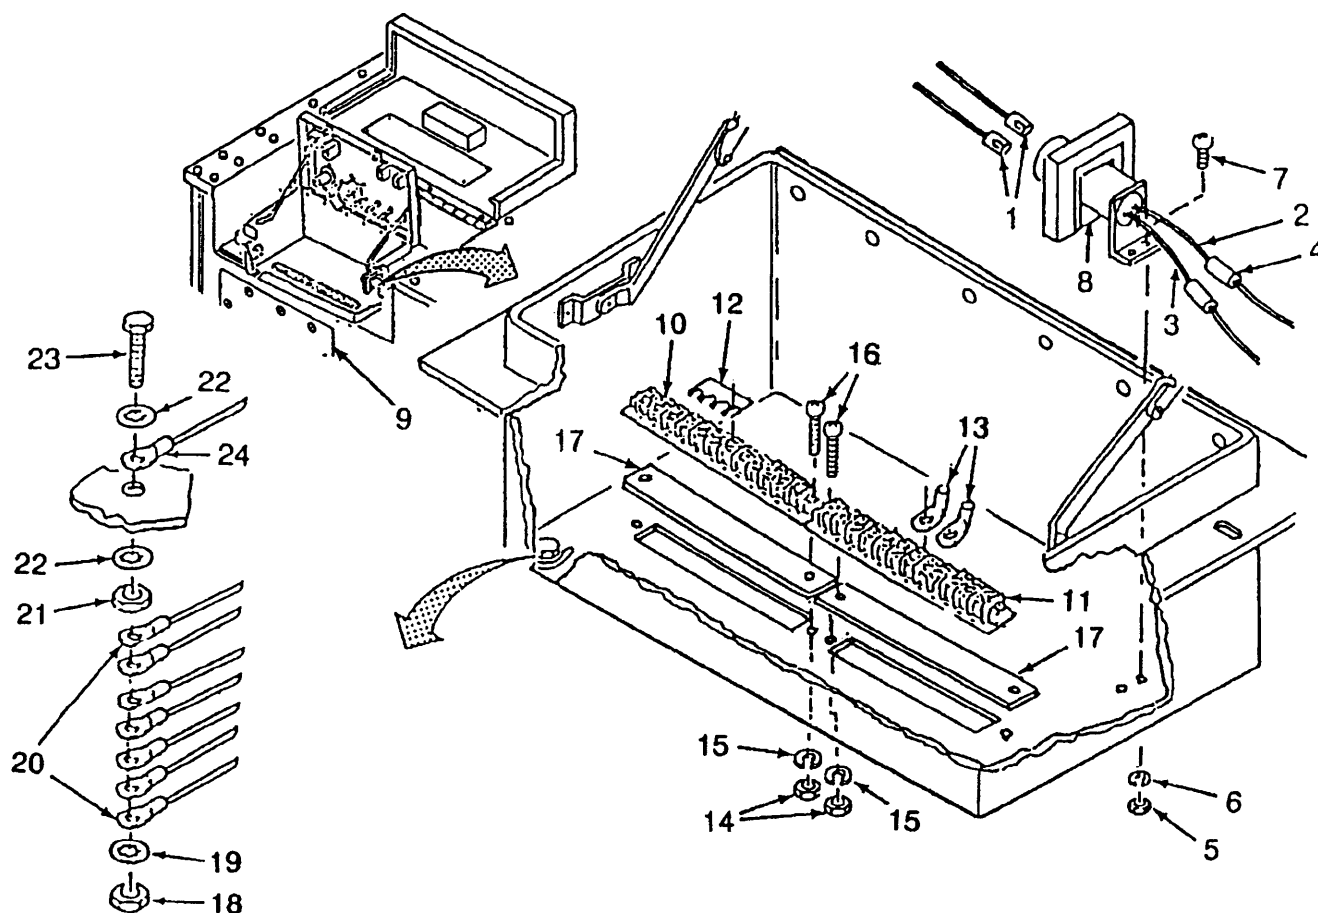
Control Box Disassembly, Transformer/Terminal Boards
